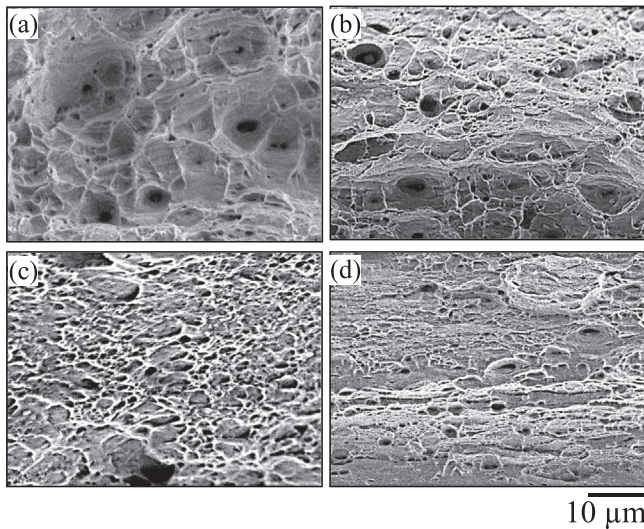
Corner of fracture surface of (a) H350, (b) H410, (c) H490, and (d) H550 specimens ruptured in DNG.
